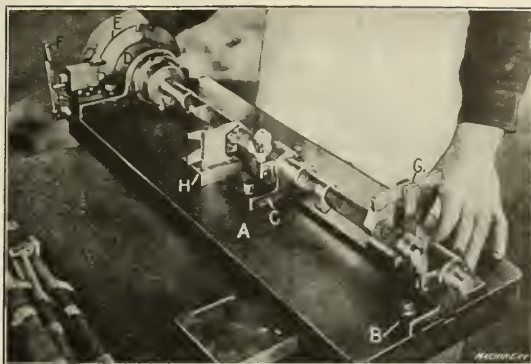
Simple Type of Gas Engine Cam Testing Fixture for determining Shape of Cam, Angularity, Lift, etc.
